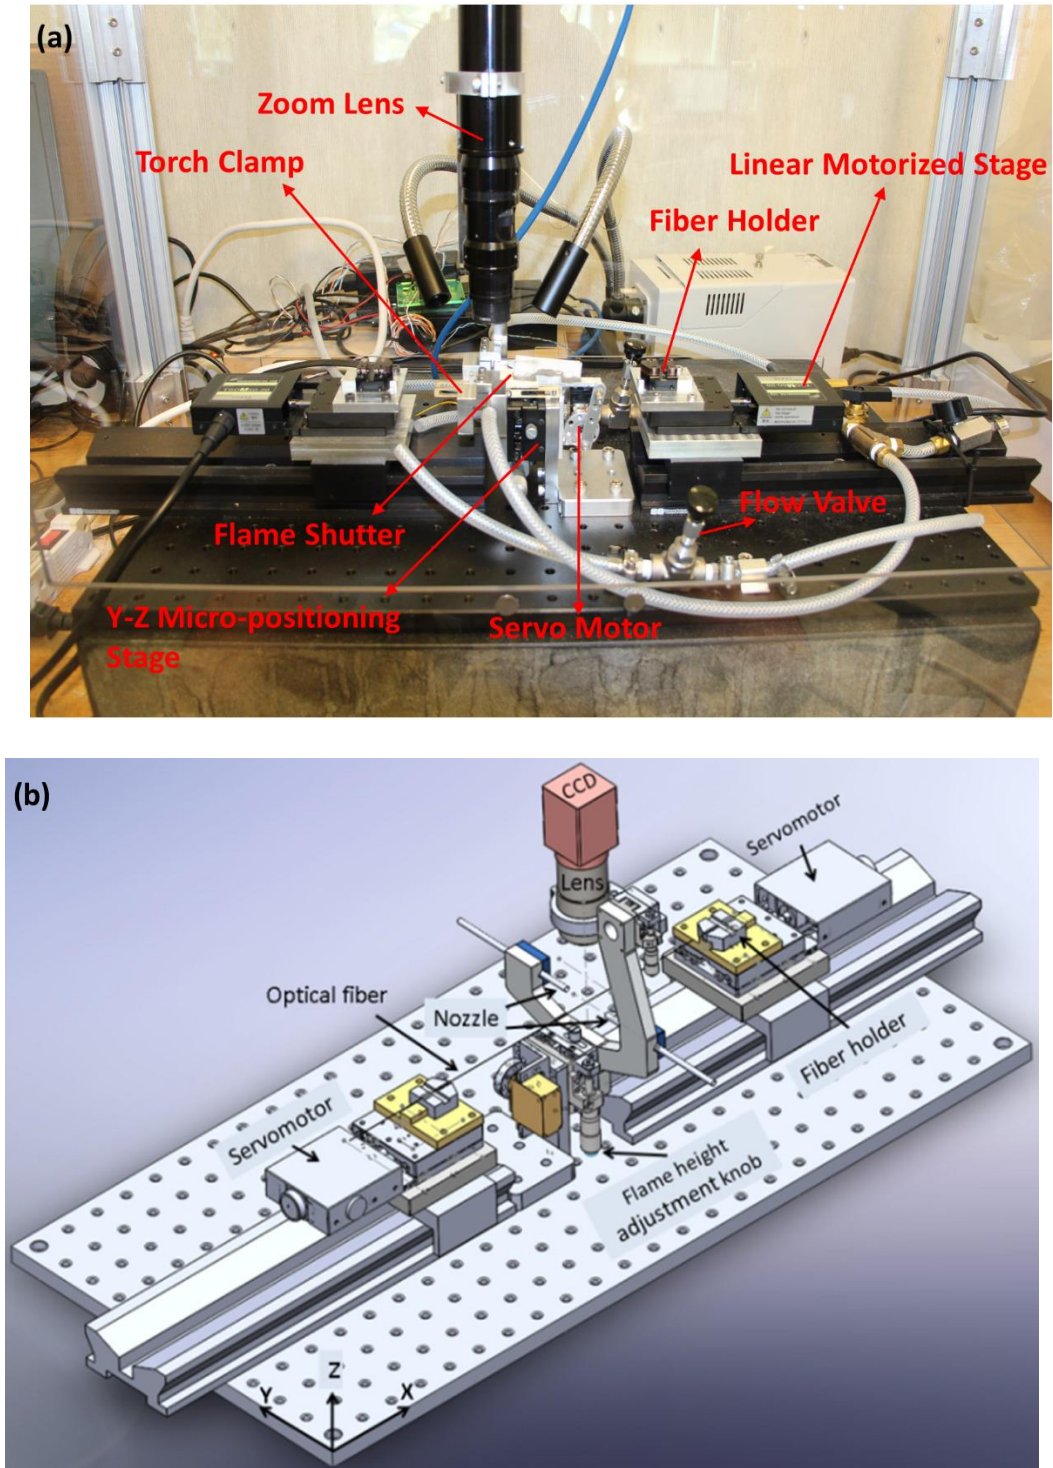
(a) Manufactured flame-based tapering machine, and (b) 3D model of the designed machine.
